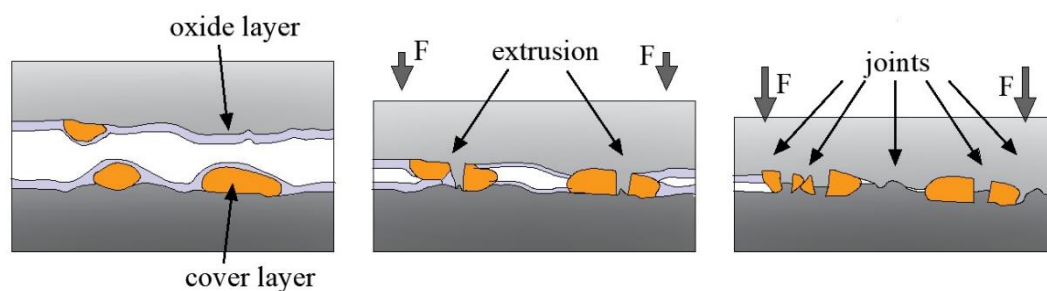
Schematic representation of the three steps leading to the formation of press welding joints between two surfaces (drawing based on Bay et al. ^[126]).
